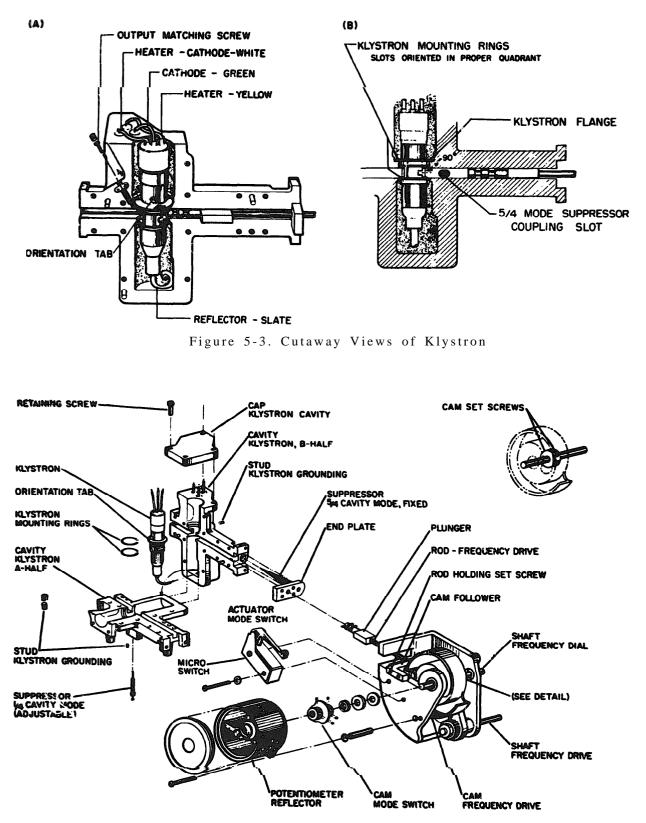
Exploded View of Klystron Cavity and Plunger Drive Mechanism
